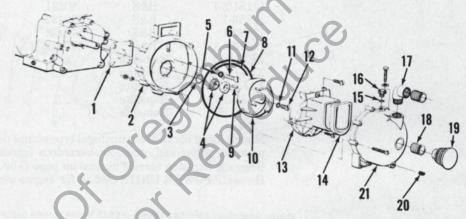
Exploded view of AP series centrifugal pump.
